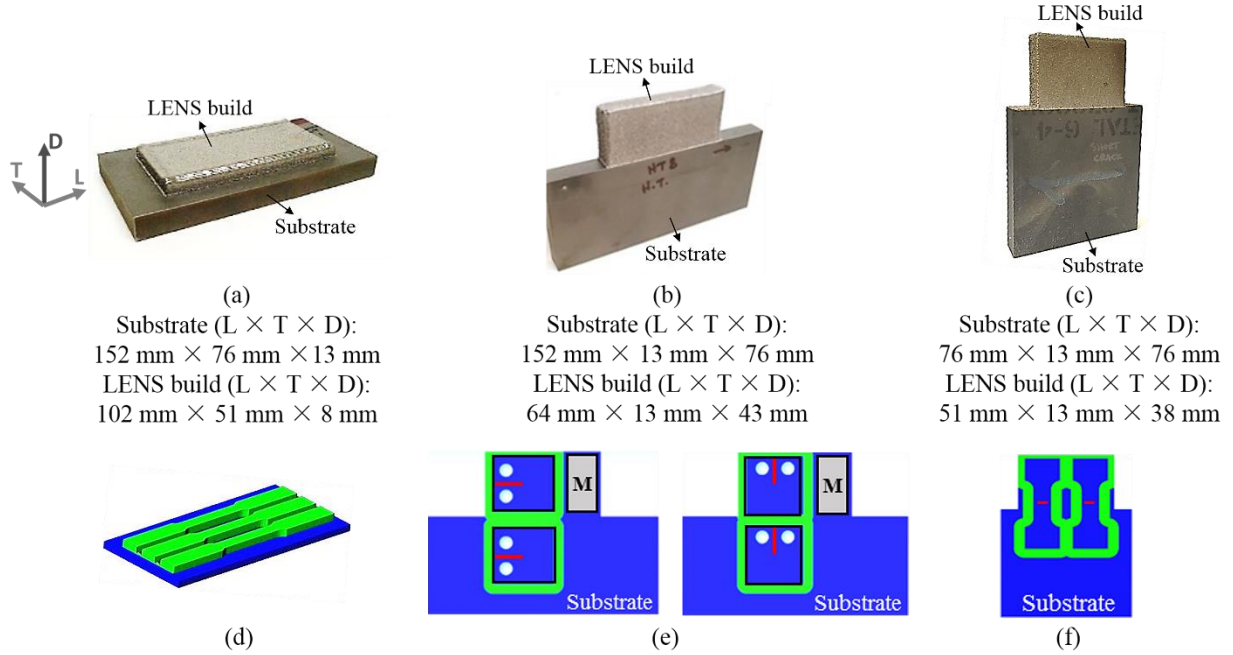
Near-net-shaped LENS depositions designed for (a) tensile testing, (b) long fatigue crack growth testing, and (c) microstructurally-small fatigue crack growth testing; (d-f) layout of the specimens extracted for metallography (M) and mechanical testing.
